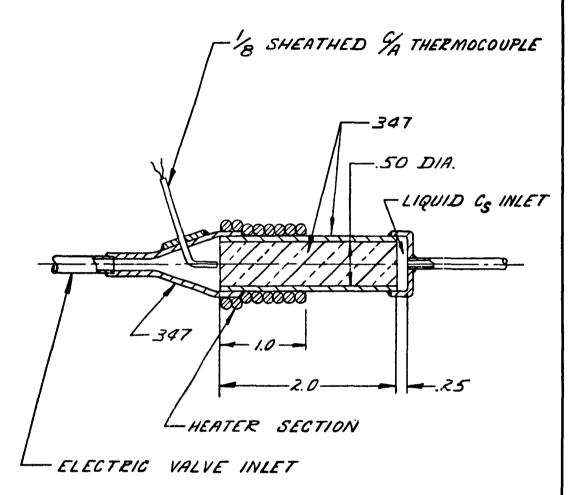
shows a schematic of the prototype vaporizer assembly.
